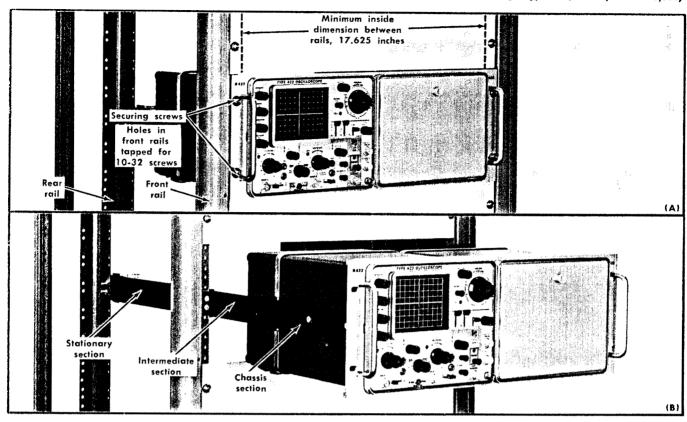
The Type R422 installed in a cablnet rack (slides removed): (A) Held into rack with securing screws; (B) extended on slide-out tracks.
